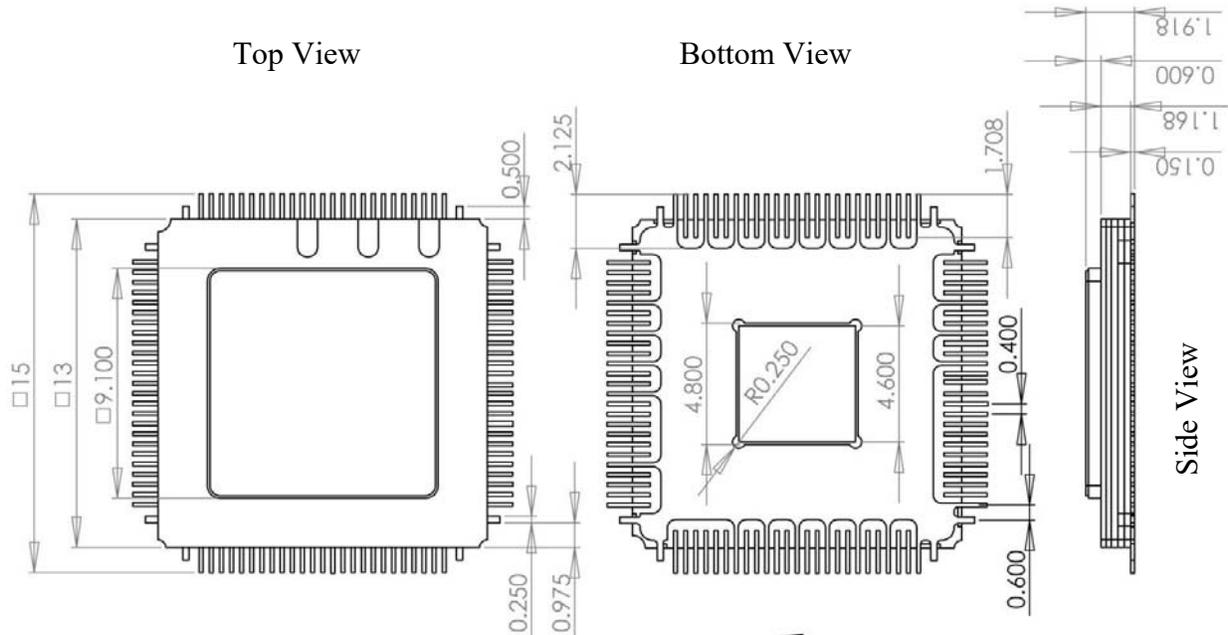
CQFP100 Package Drawing (All Dimensions in mm)
